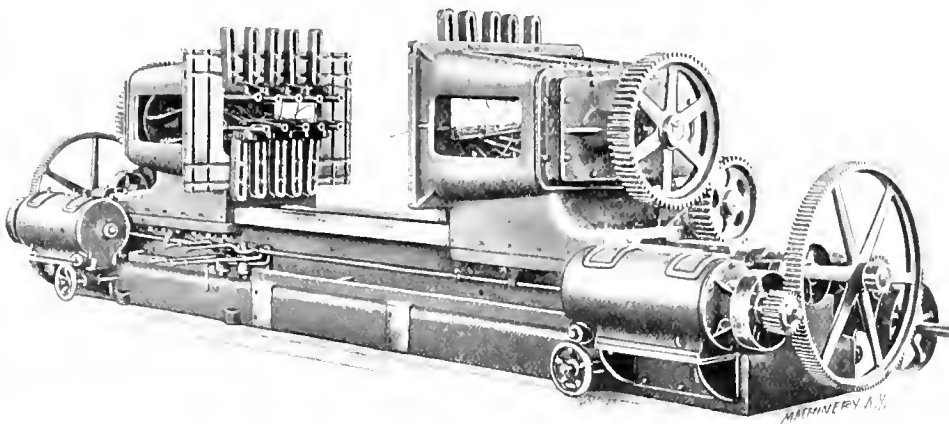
Double-head, Ten-spindle Baush Horizontal Drilling Machine.
